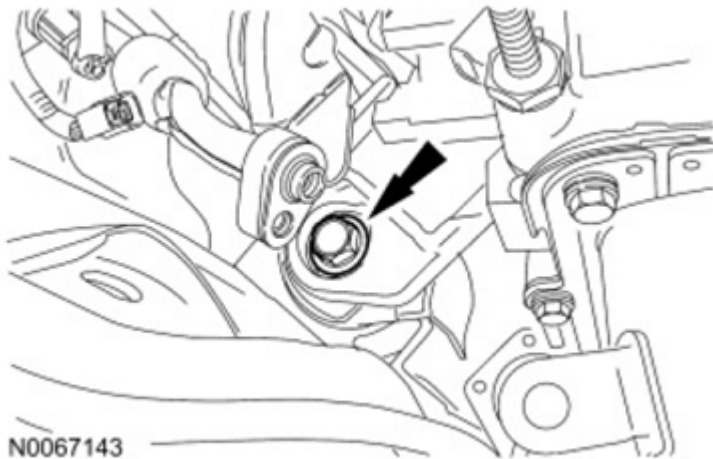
Locating RH Engine Support Insulator Through Bolt
